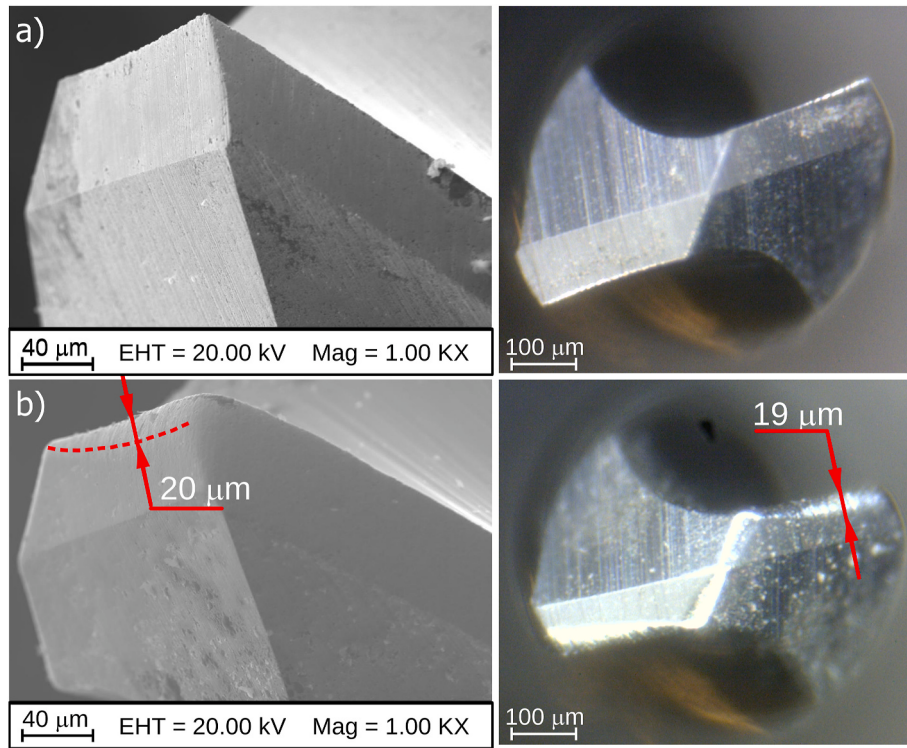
Scanning electron microscopic and optical images of the micro-drills: a) sharp edges of the micro-drill prior to the experiments, b) drilling-induced tool wear on the flank surface of the micro-drill after machining 1050 holes.
